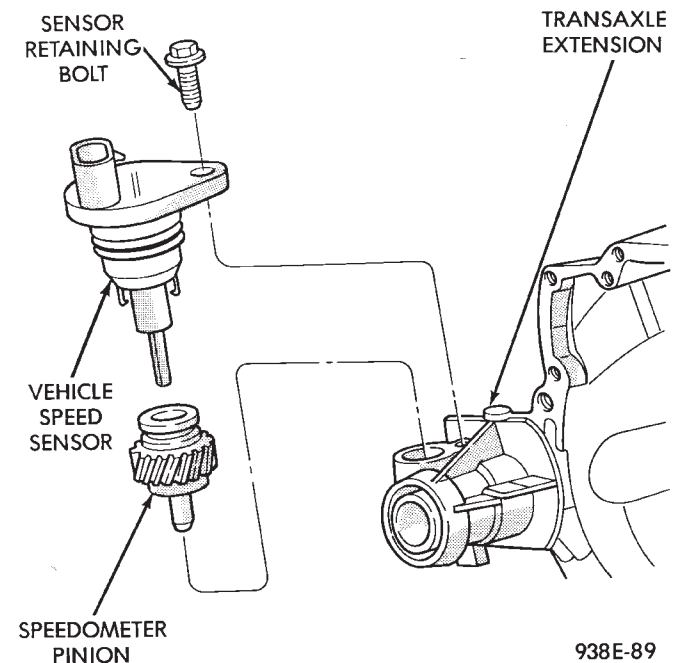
Vehicle Speed Sensor and Speedometer Pinion
